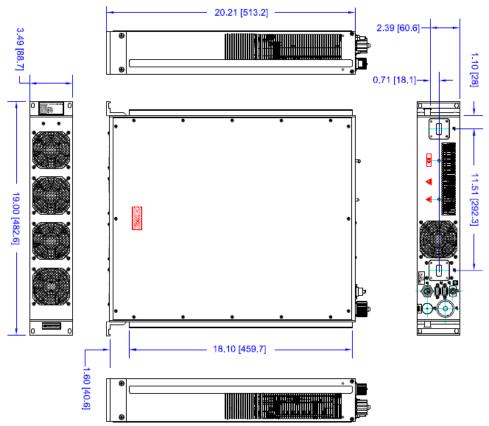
Outline Drawing of 400 W X-Band Transmitter Unit
